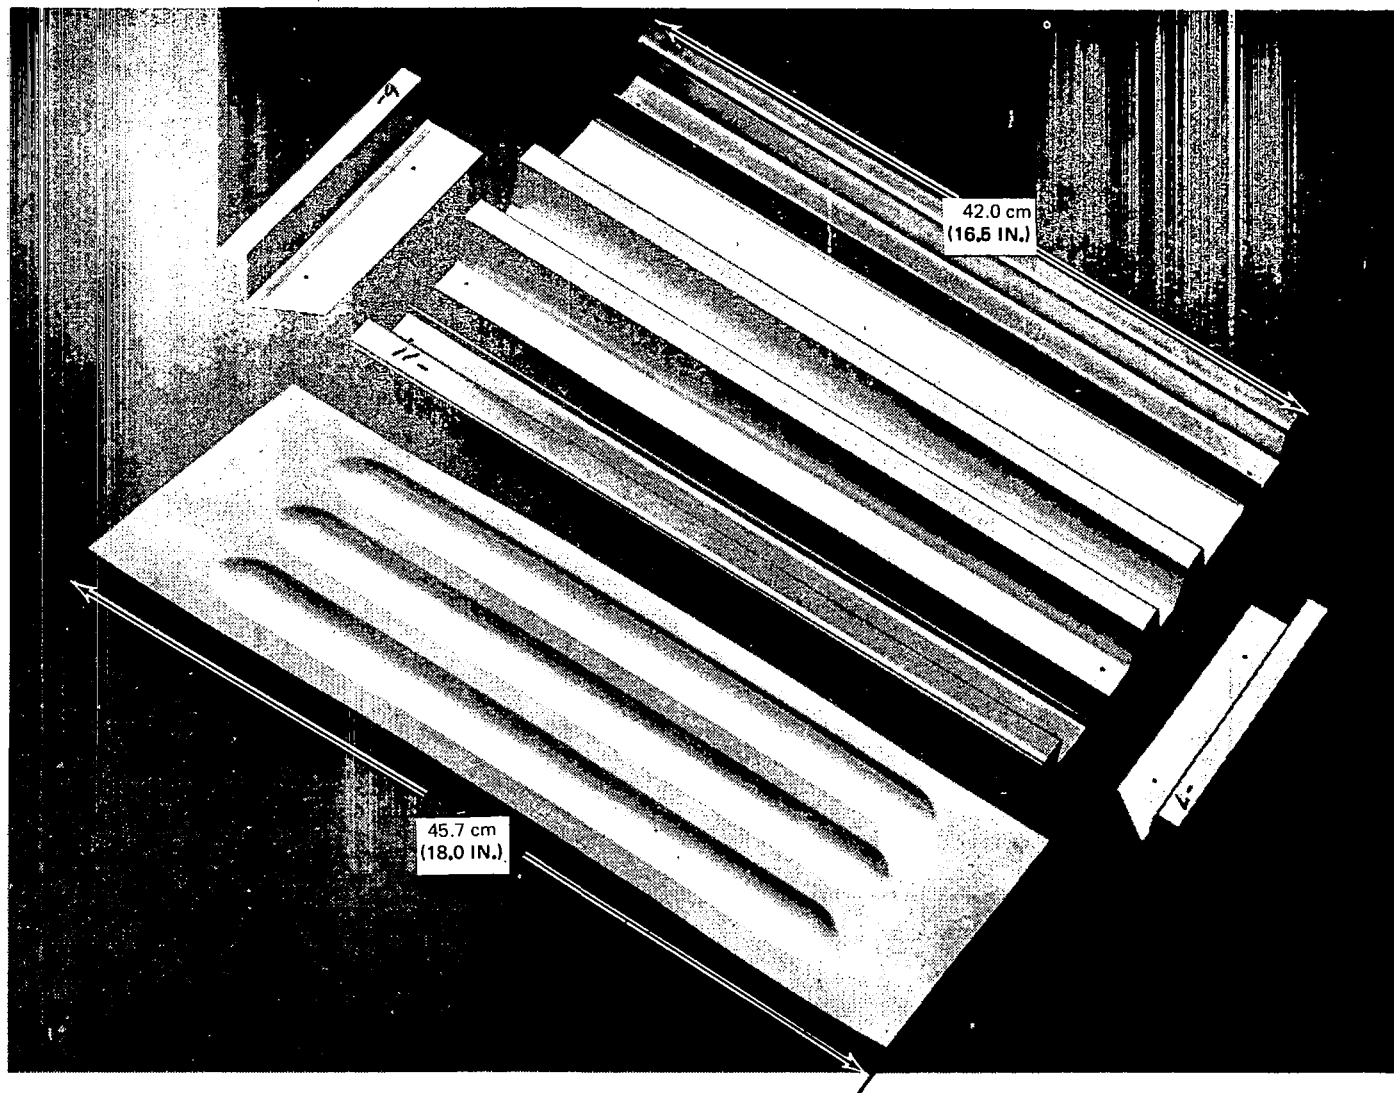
Detail Parts for Corrugation-Stiffened Test Panel
